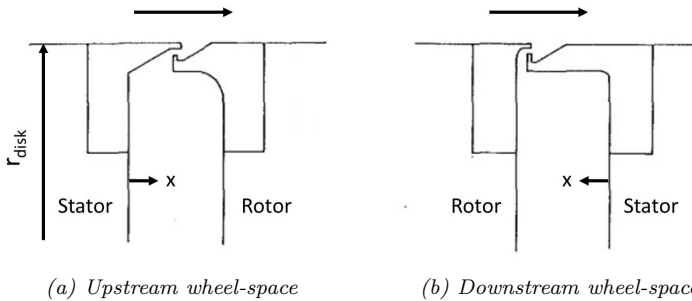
Representation of the (a) Upstream wheel-space equipped with rim seal A and (b) Downstream wheel-space equipped with rim seal B. Adapted from Dadkhah et al. [36].
